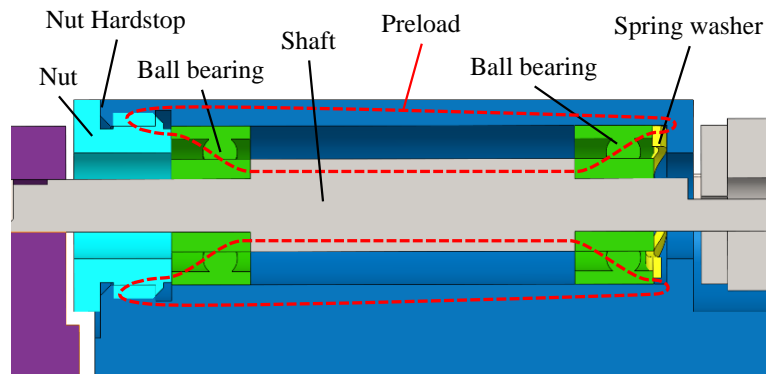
Preload of the beta axis bearings. The nut is locked against a hardstop on the housing and creates the preload via the inner rings of the bearings and the spring washer.
